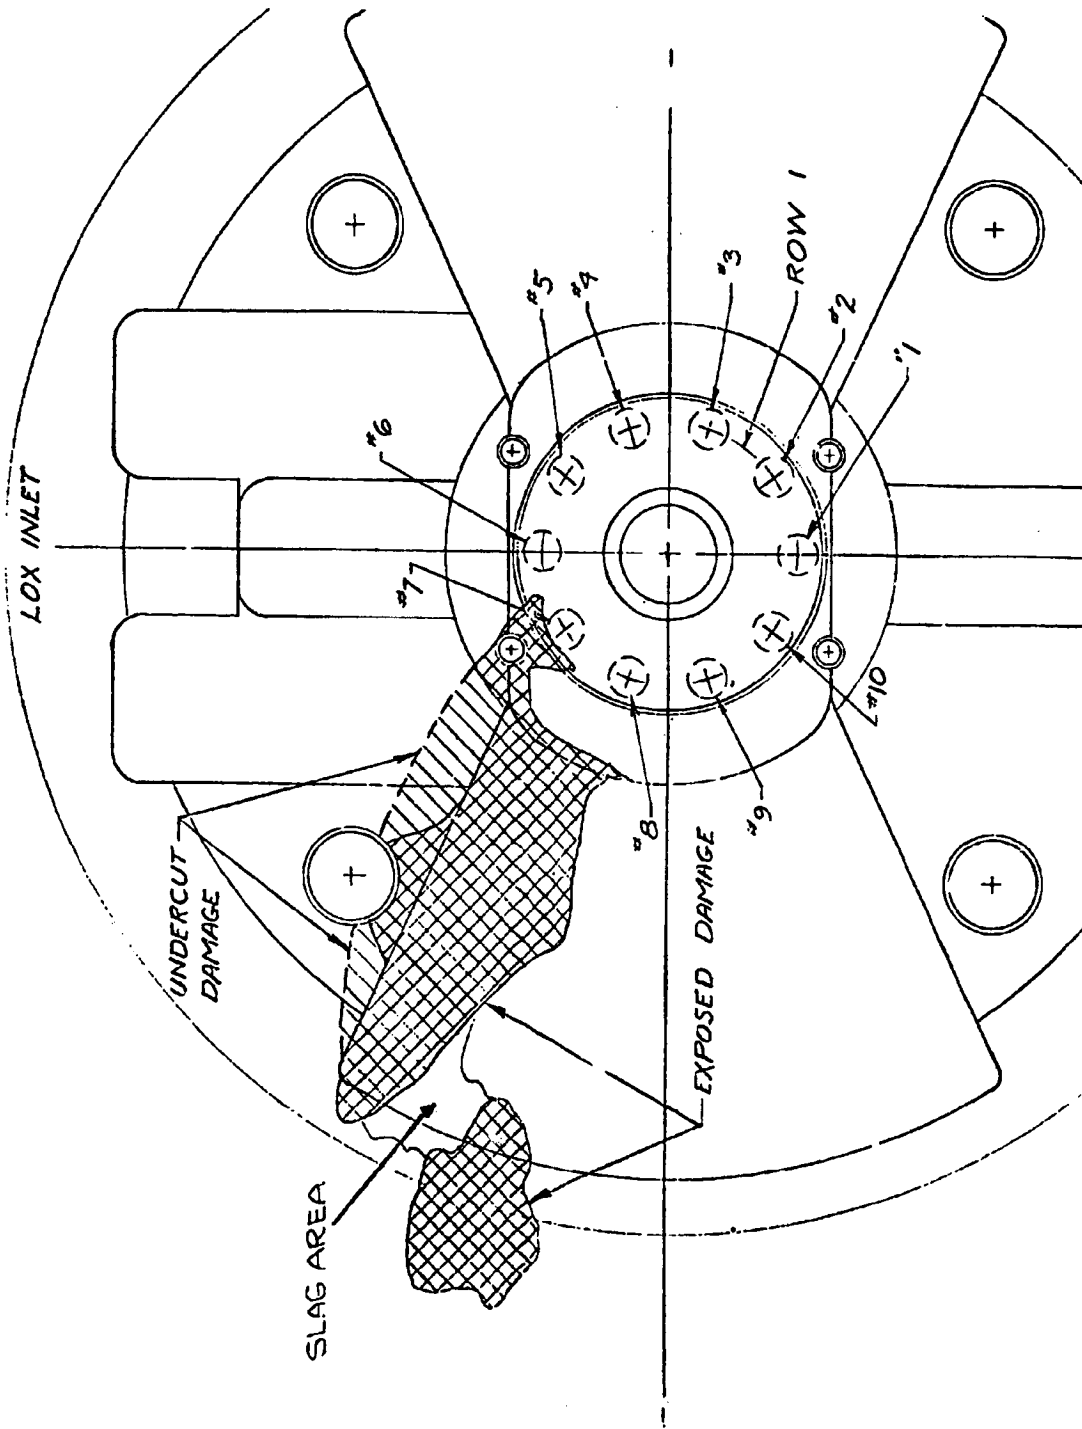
Engine J016-4, Test 313-041, Posttest Injector Condition Showing Oxidizer Dome Damage
